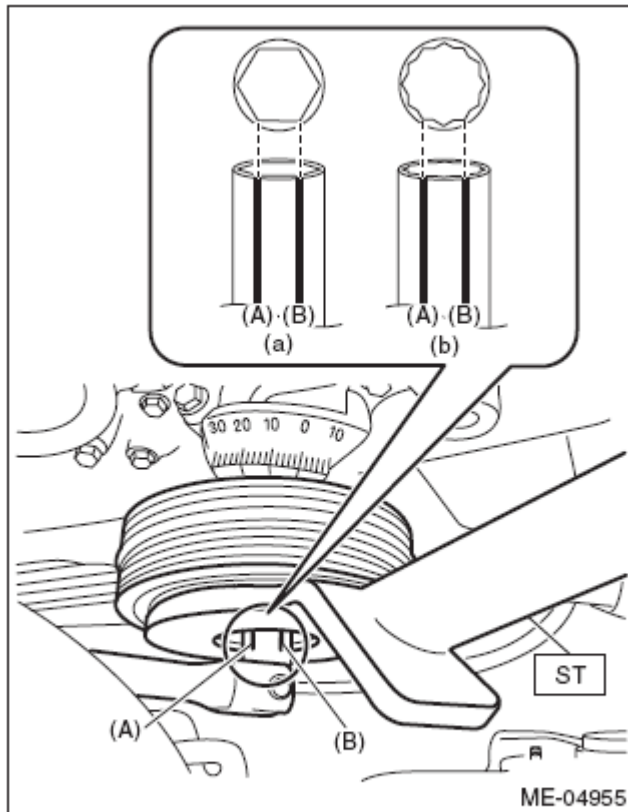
Tightening Crank Pulley Bolt Using Crank Pulley Wrench
